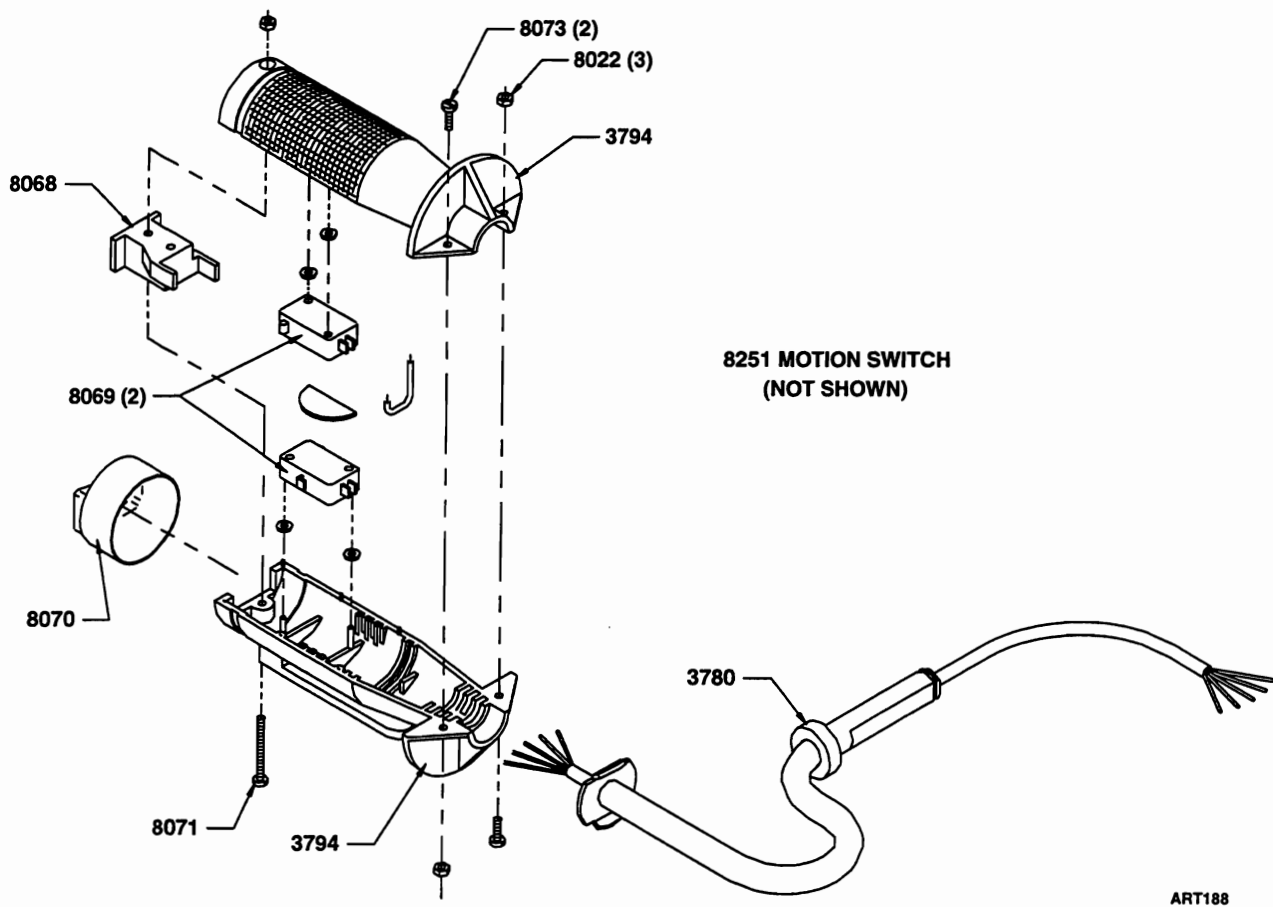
Optional Upper Control Box Assembly - Electric Units (Sheet 4 of 5)
